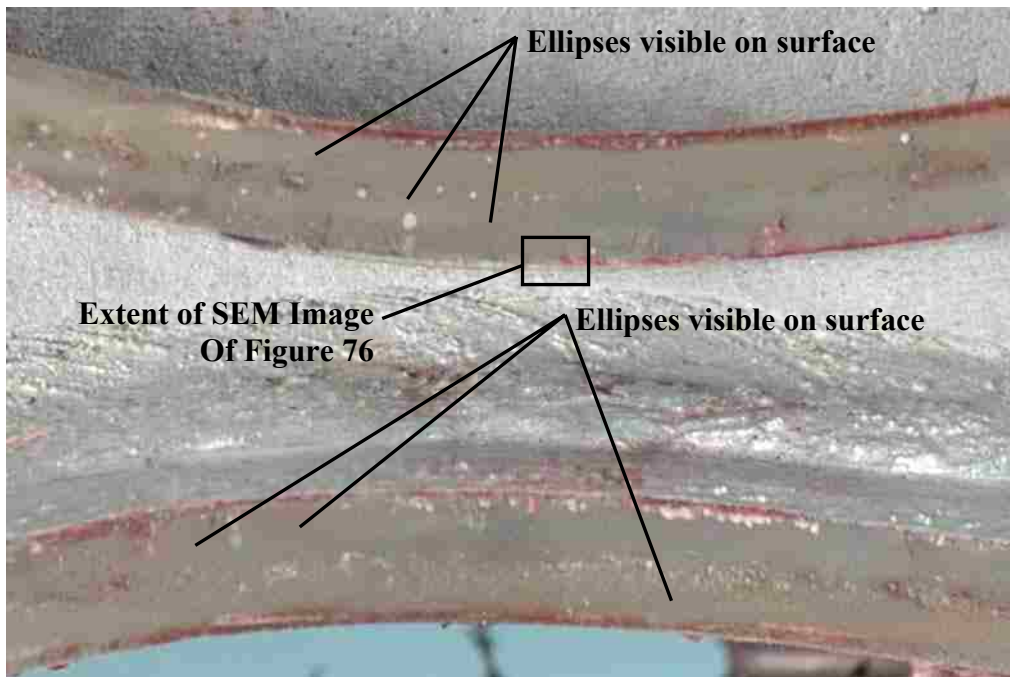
Enlarged view of specimen X-2 fracture surfaces (refer Figure 74)
